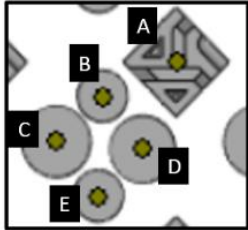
Specimen Build Plate Layout (build plate is 250 mm x 250 mm).
